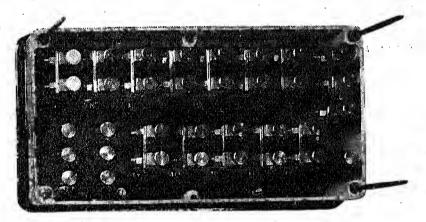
Fig. A.—Typical protective-gear test-link assembly (cover removed).
